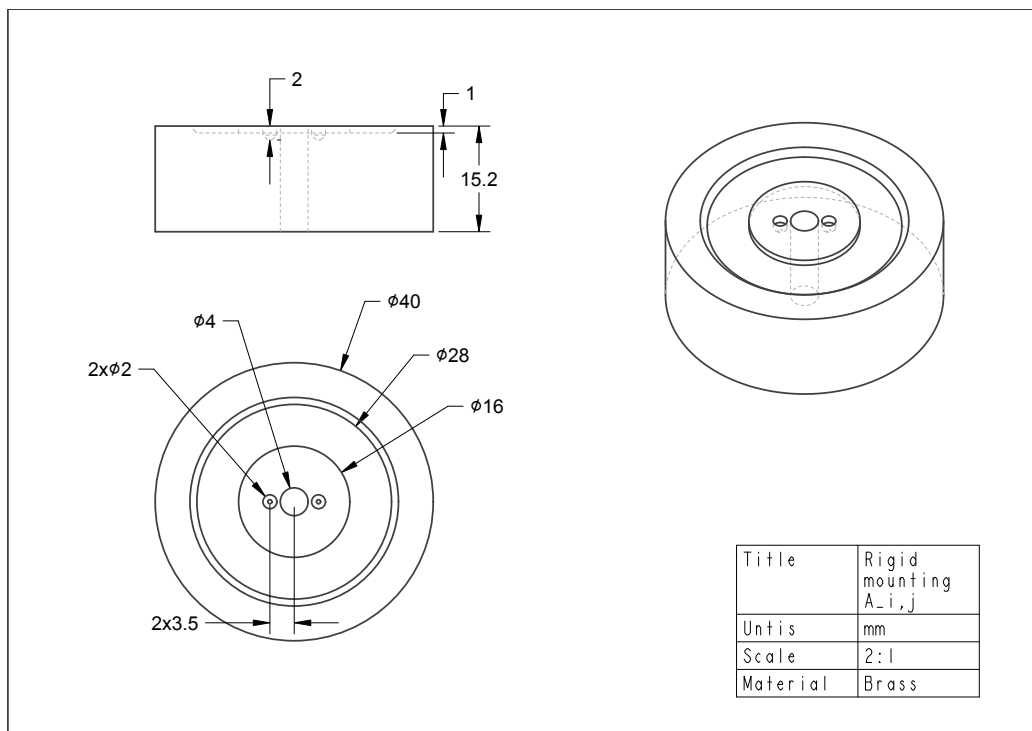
Technical drawing of Rigid Mounting Solution for  $A_{i,j}$ .
